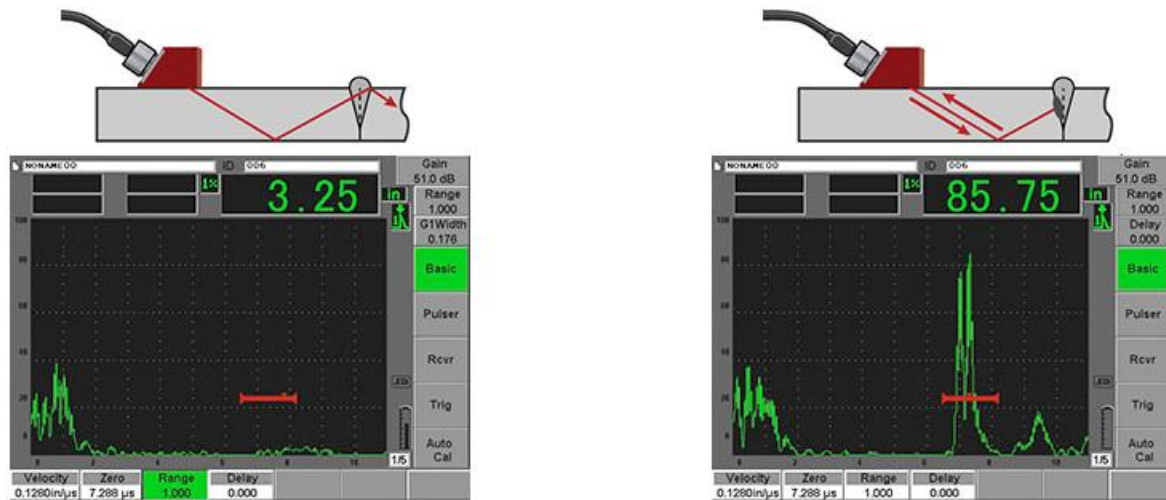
Good weld without reflecting back and a discontinuity within the weld zone causes a strong reflection
